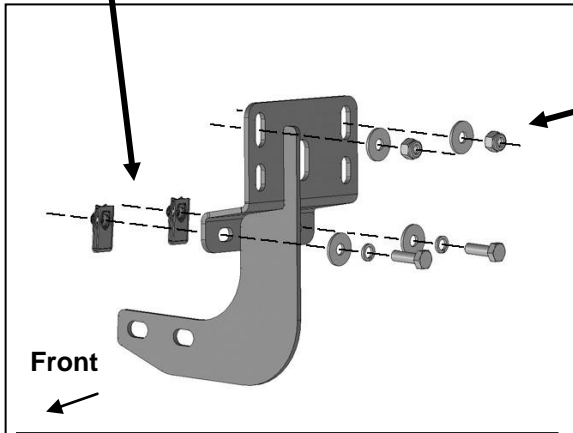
Passenger/right front and #2 mounting location pictured. Note front location with factory mounting studs (arrow)
